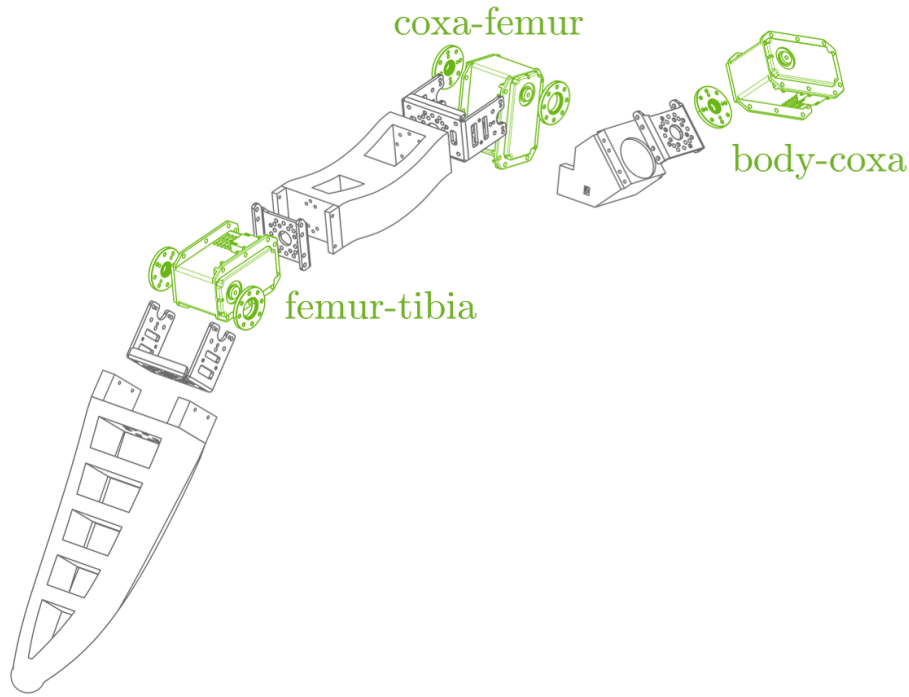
Motors link the connector pieces with each other and to wagon representing the body. The nomenclature denotes which parts are linked. Dimensioned drawing in appendix (Fig. A.2).
